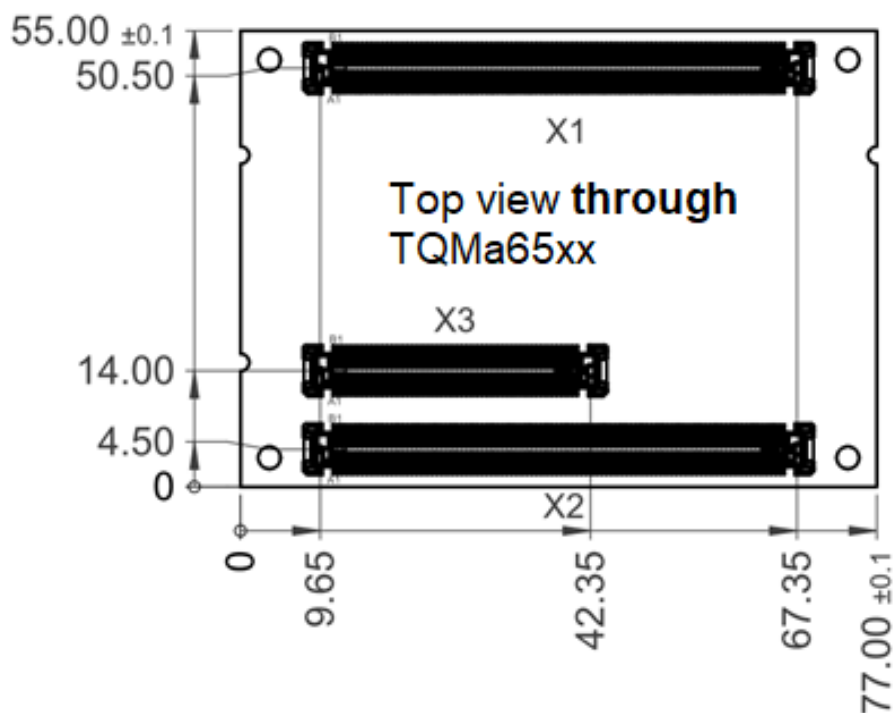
TQMa65xx dimensions, top view through TQMa65xx
